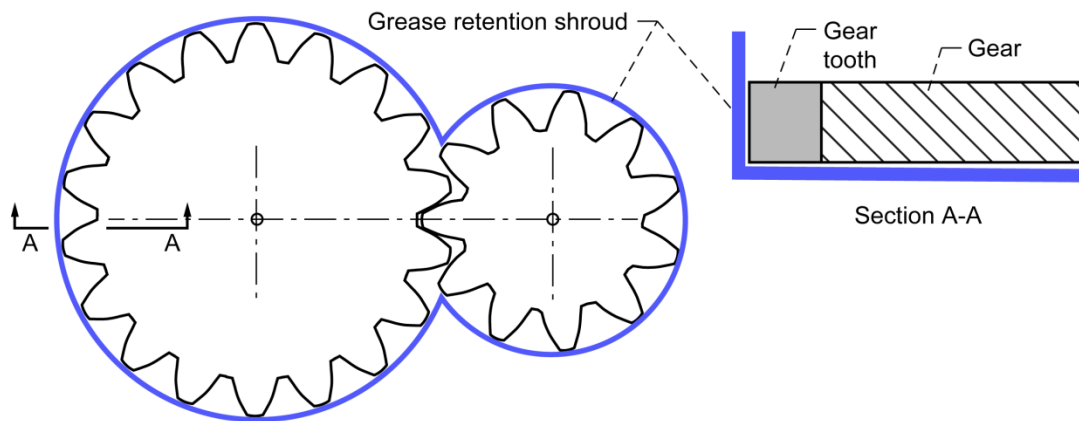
Grease retention shroud concept: left - top view; right - side view.
